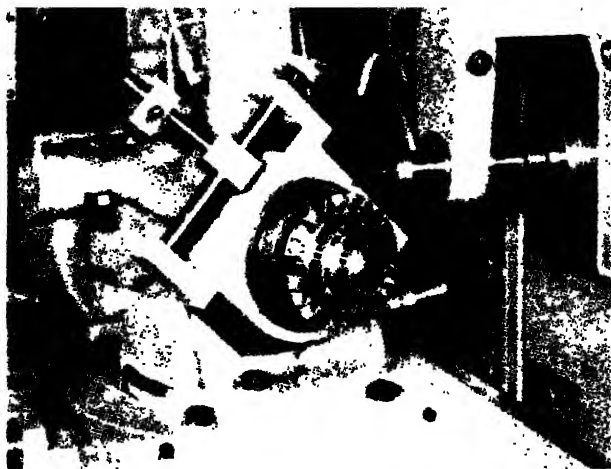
Indexing fixture for the machining of rock-bit drill head used in the drilling of oil wells. (*The Cincinnati Milling Machine Company*)
